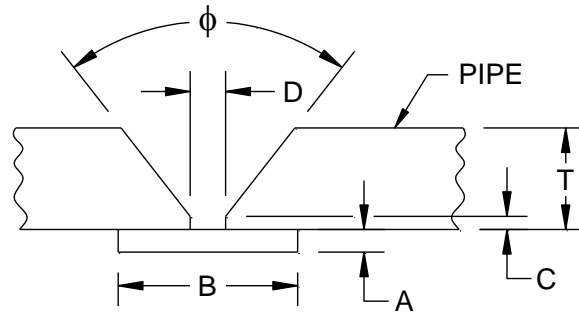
Performance Qualification Test No. 3B for Fuel Gas Welding (Pipe)
